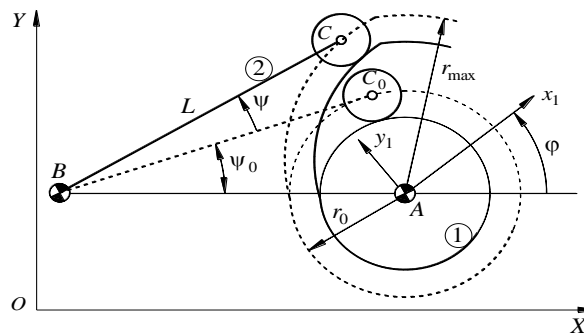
Rotating cam and rotating roller cam follower, with circular active surface.
